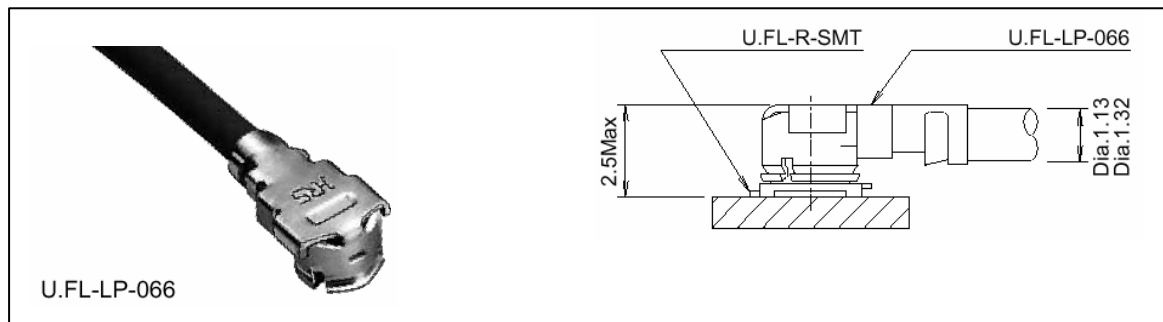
U.FL-R-SMT connector with U.FL-LP-066 plug
